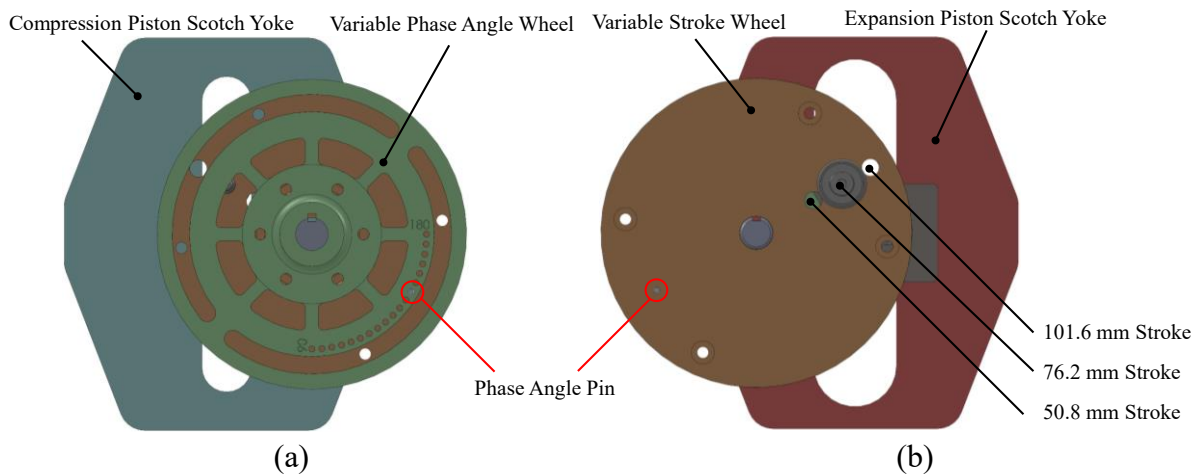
Compression Piston Cranks (a) Variable Phase Angle Wheel (b) Variable Stroke Wheel
